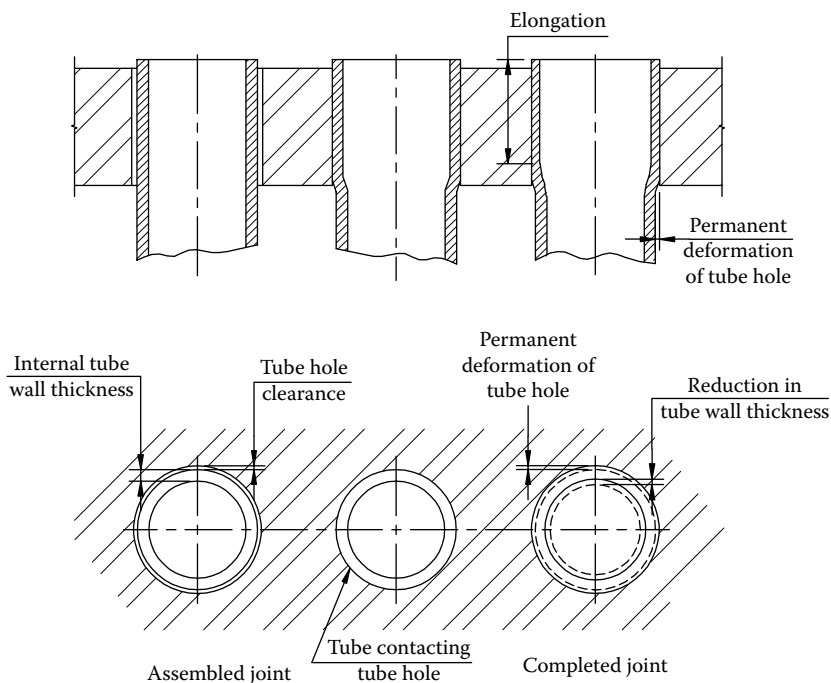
Basics of tube rolling process. (a) A tube inside the tubesheet hole, (b) tube contacting the tubesheet, and (c) permanent deformation of tube completed joint. (After Fisher, F.F. and Brown, G.J., *Trans. ASME*, 565, 1954.)
